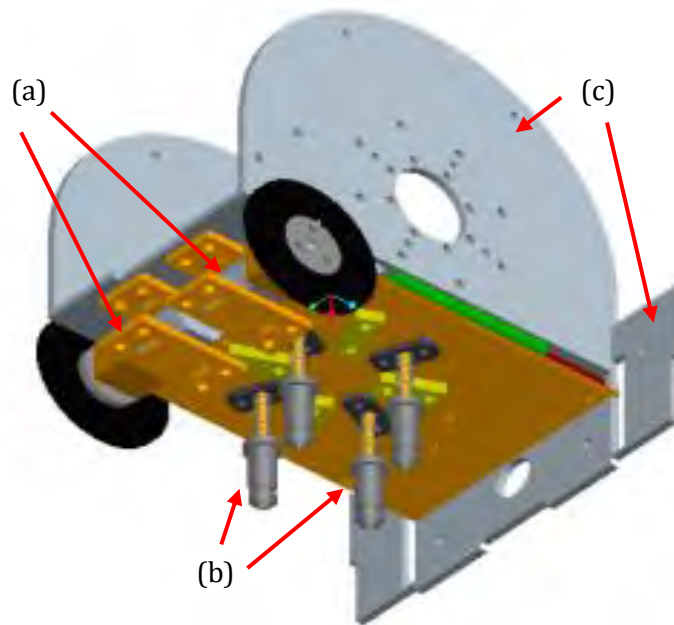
CAD model of a Wheeled atom inner assembly, showing the locations of (a) two motorized wheel assemblies, (b) four spring bolt assemblies belonging to one docking connector, and (c) atom's ABS plastic support structures.
